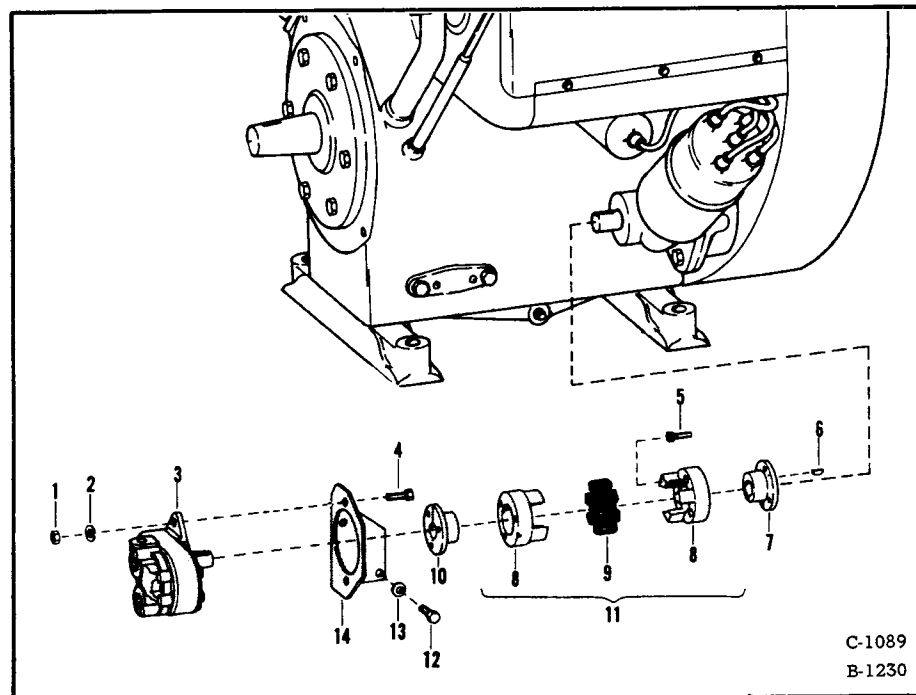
Aligning Hydraulic Pump to Engine Drive Shaft
